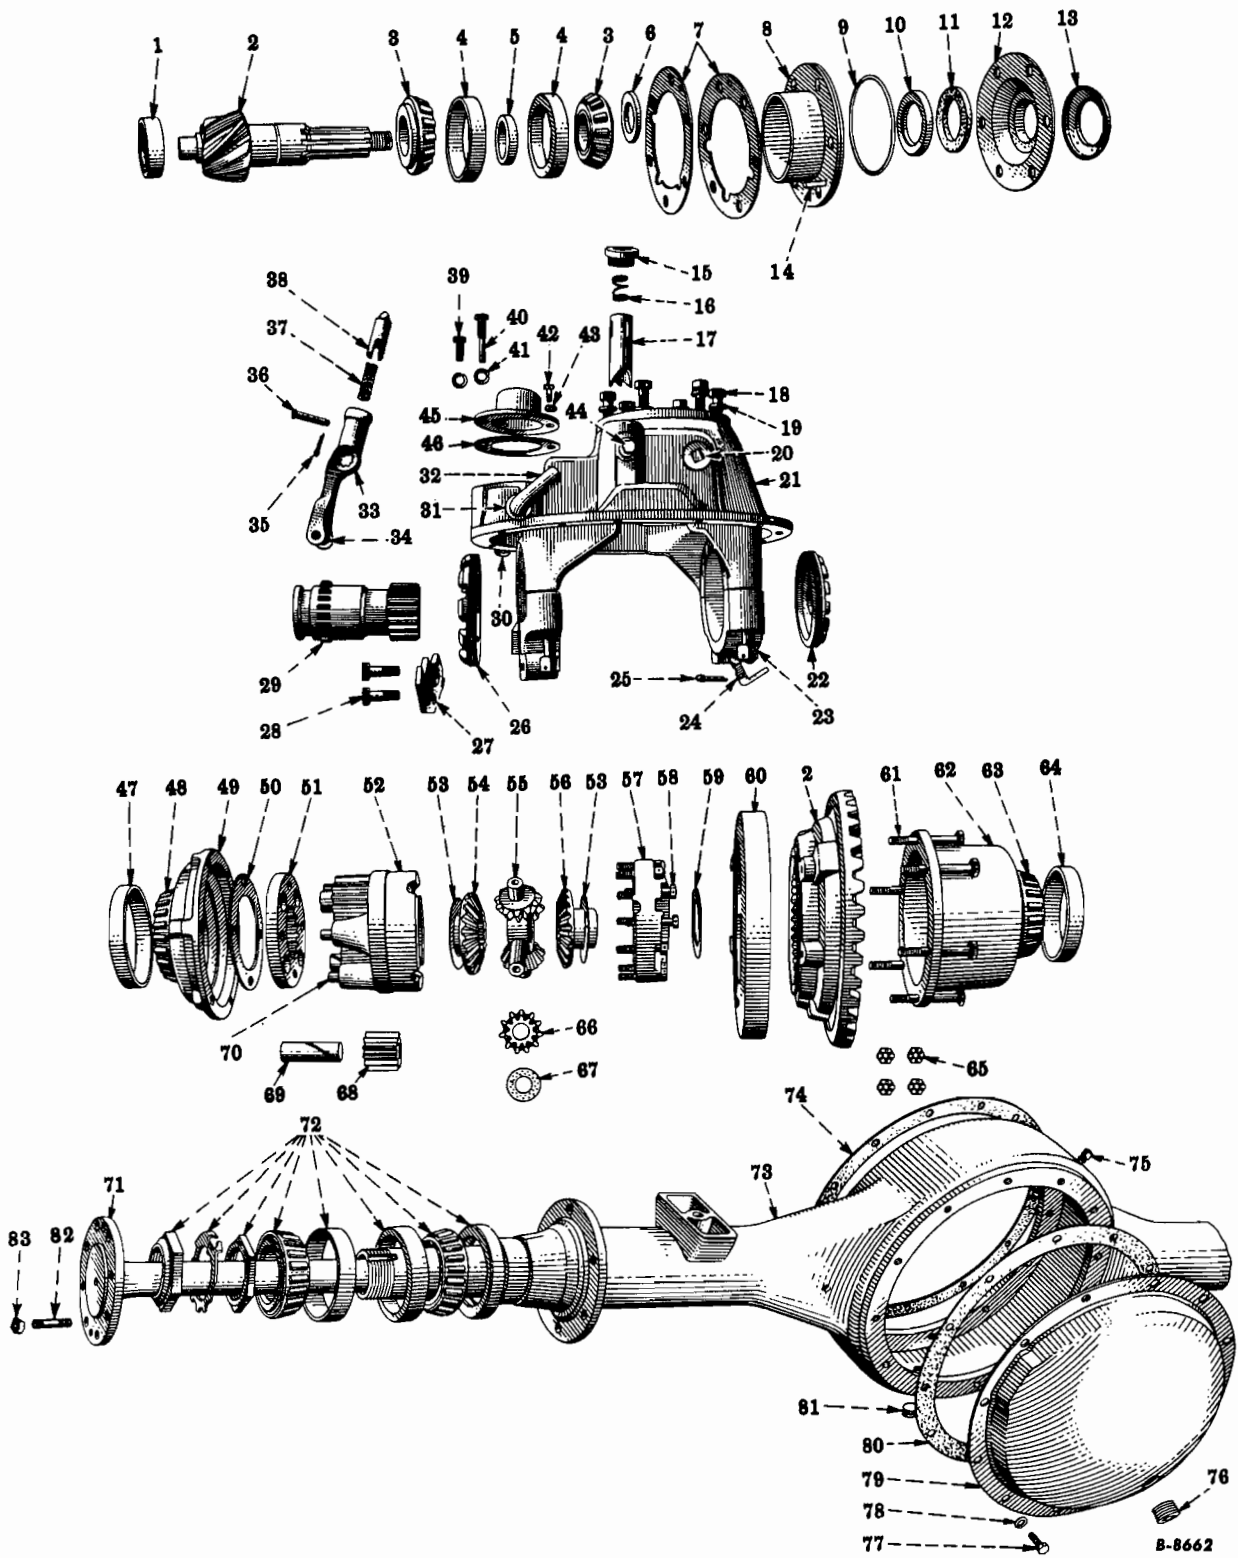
REAR AXLE ASSEMBLY (Eaton, Model E-1350, Two-Speed, Code 1457)
